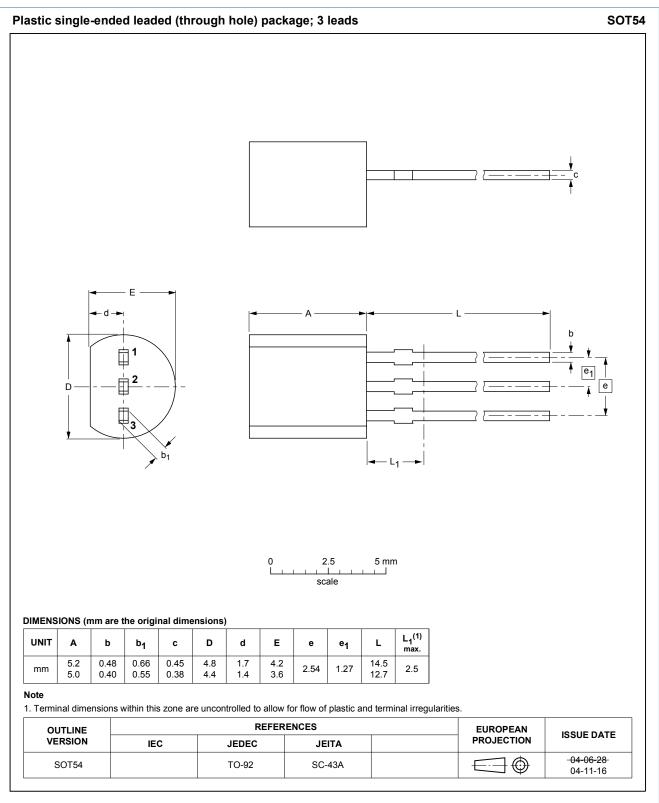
Package outline TO-92 (SOT54) BT131-800 All
